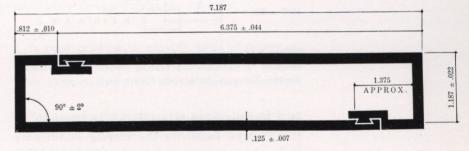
Dovetail Fits* up to 10 feet in length are widely used where the desired shape is too large for a single extrusion or if manufacturing limitations prevail; also if two extrusions must be machined before assembly.
